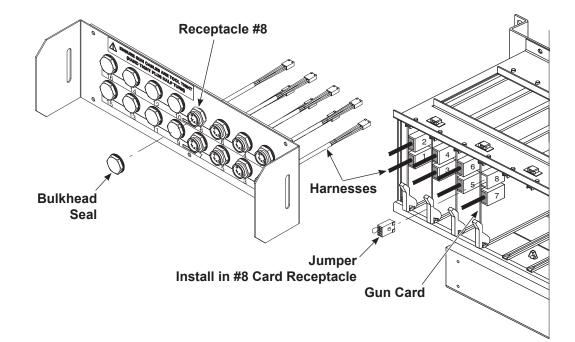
Seal and Jumper Installation - Example Showing 8 Gun System Using 7 Guns
